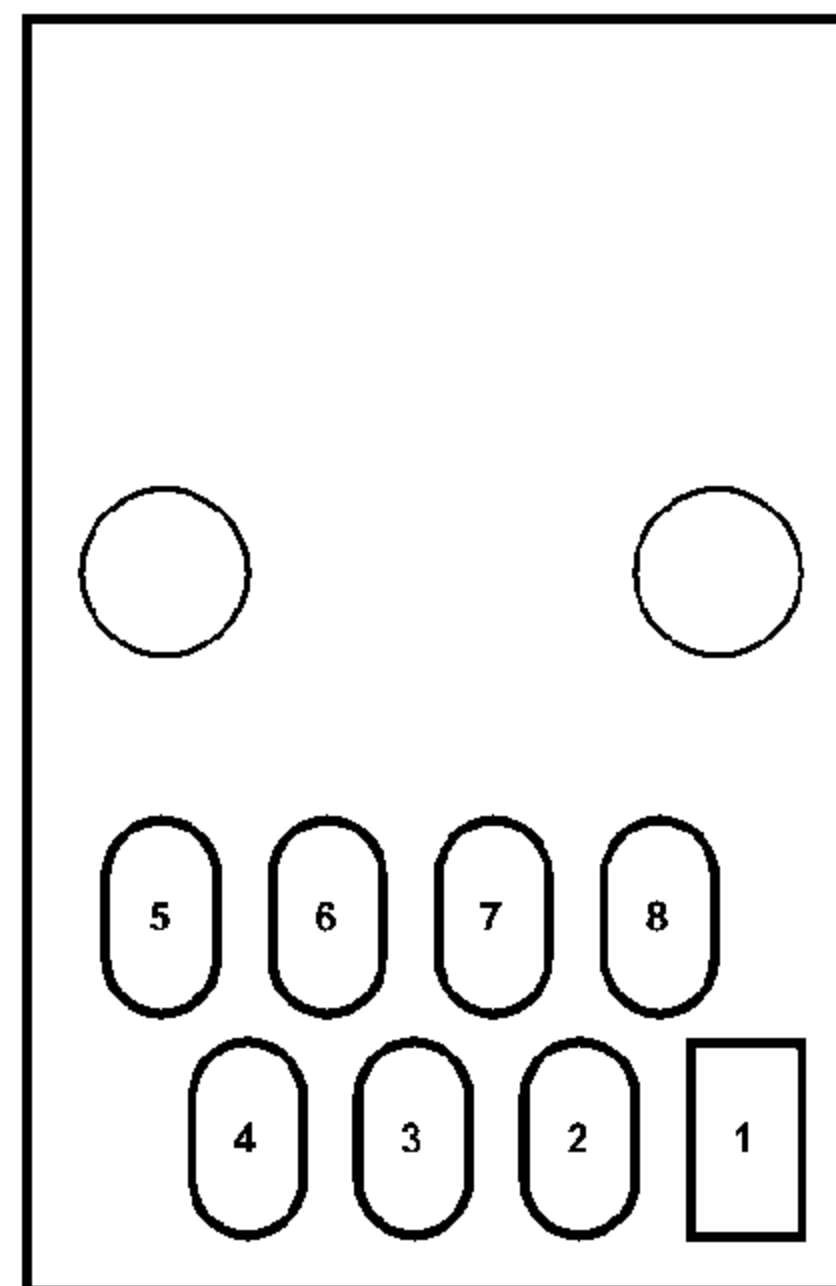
Bottom view pinout on RJ-45 PCB connector
